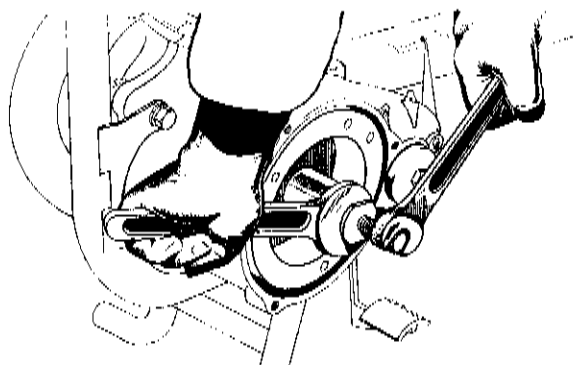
Removing the Generator Flywheel with Service Tool 61-3188.
